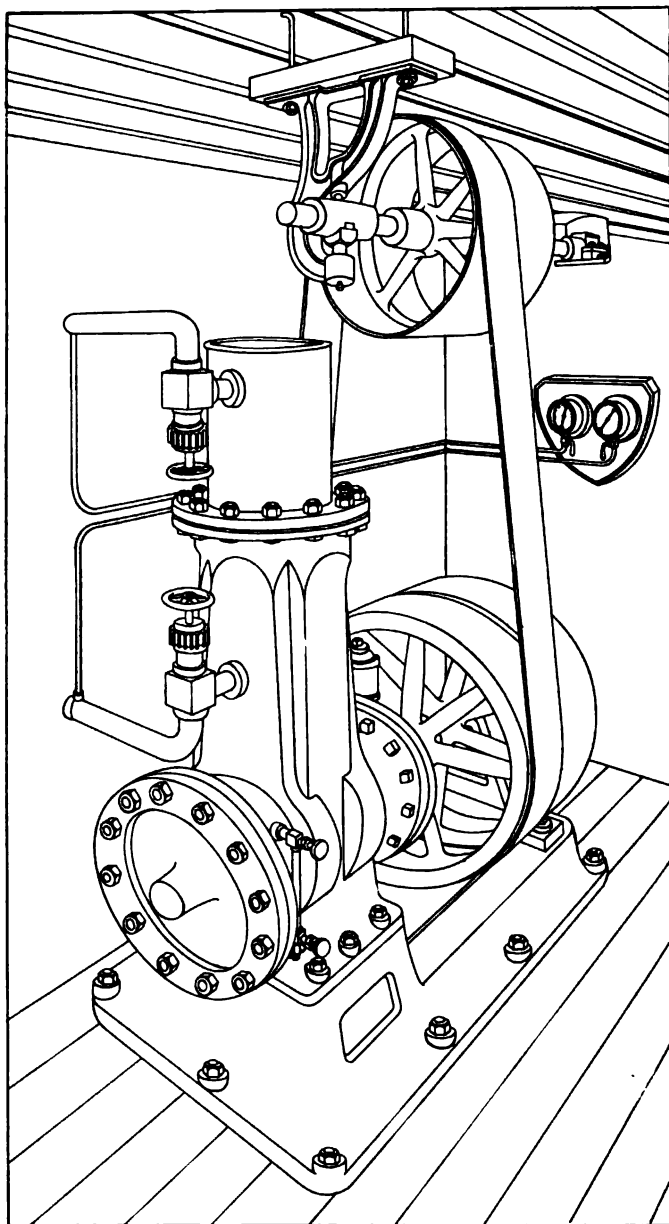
ANTARCTIC COMPOUND COMPRESSOR, PERSPECTIVE OF ENCLOSED TYPE MACHINE.
